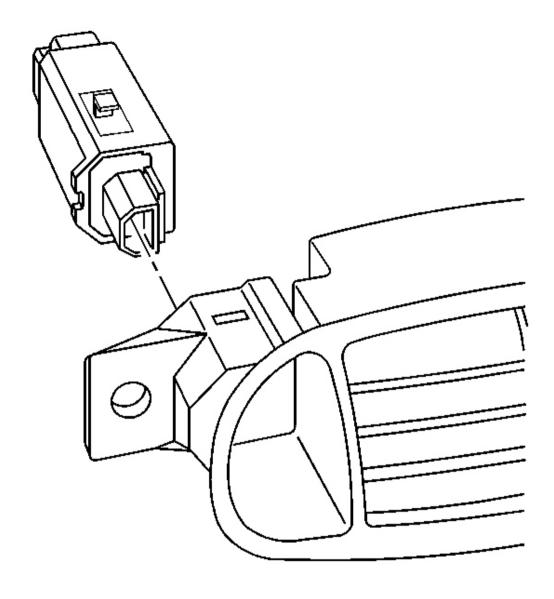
Center Air Outlet To IP Upper Trim Pad Courtesy of GENERAL MOTORS CORP.
